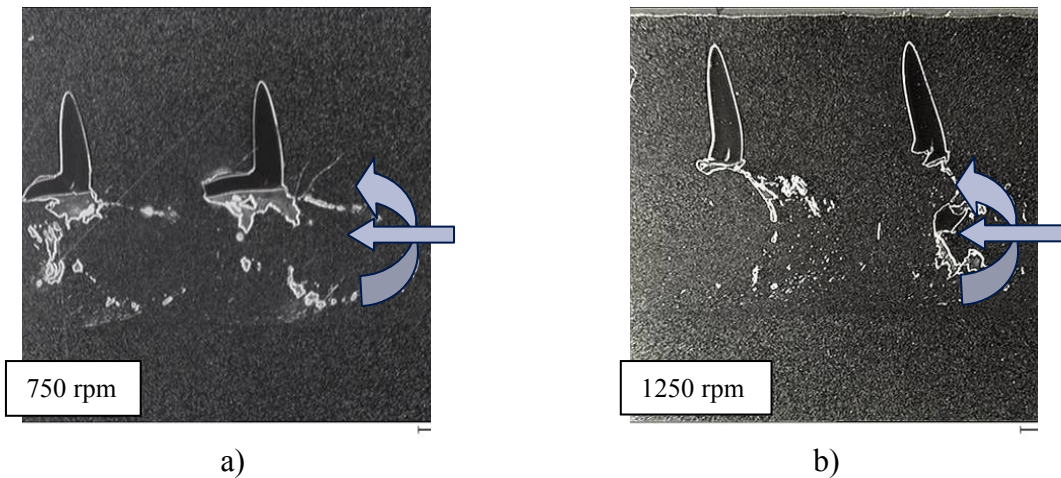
Micrographs of friction stir welded reinforced extruded aluminium, a) rotation speed 750 rpm, welding speed 150 mm/min, b) rotation speed 1250 rpm, welding speed 150 mm/min
